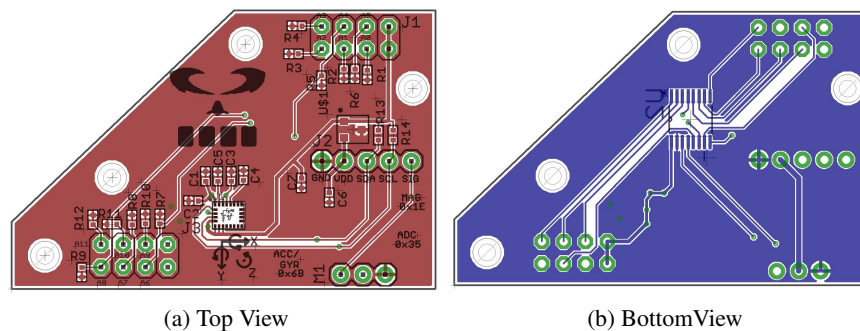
Top (a) and Bottom (b) view of the foot board
